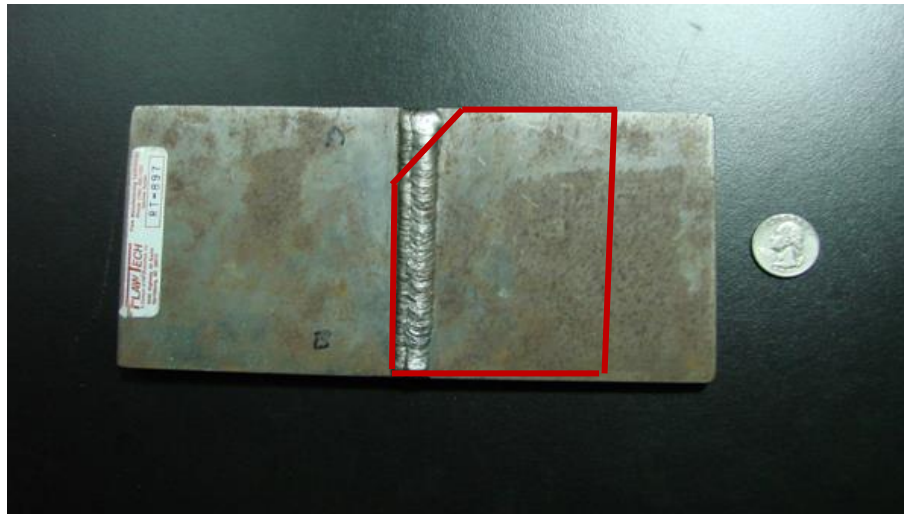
Weld phantom used for CR image testing. Quarter included for scale. The outline indicated where the ZBLAN30 plate was placed behind the weld phantom.
